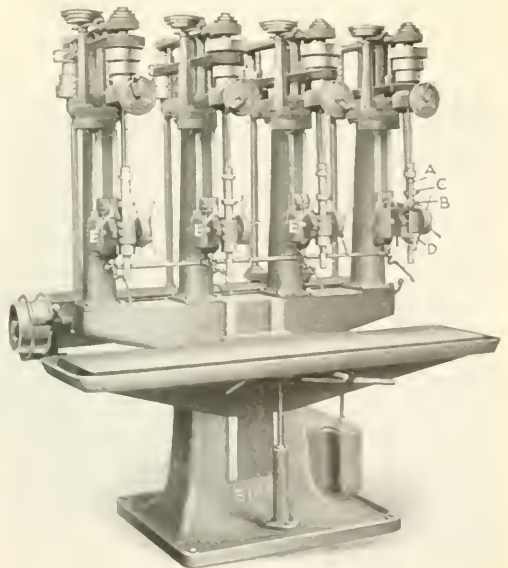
Sipp Four-spindle Drilling Machine on which Right-hand Spindle has Automatic Power Feed Mechanism
